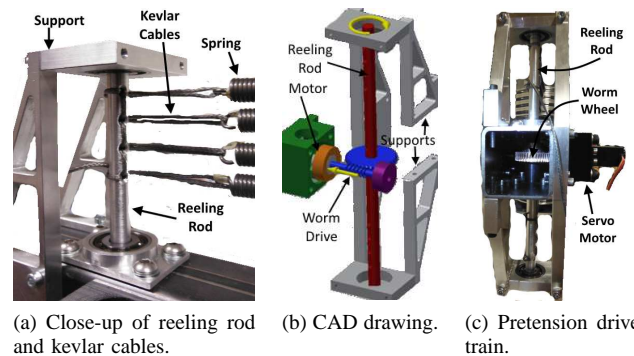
The pretensioning mechanism is designed to pretension all springs and lock the pretensioning by means of a non-backdrivable mechanism.
